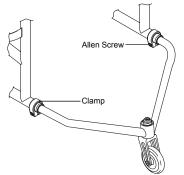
Standard Titanium 5th Wheel Anti-Tip with Swivel Caster Adjustment
